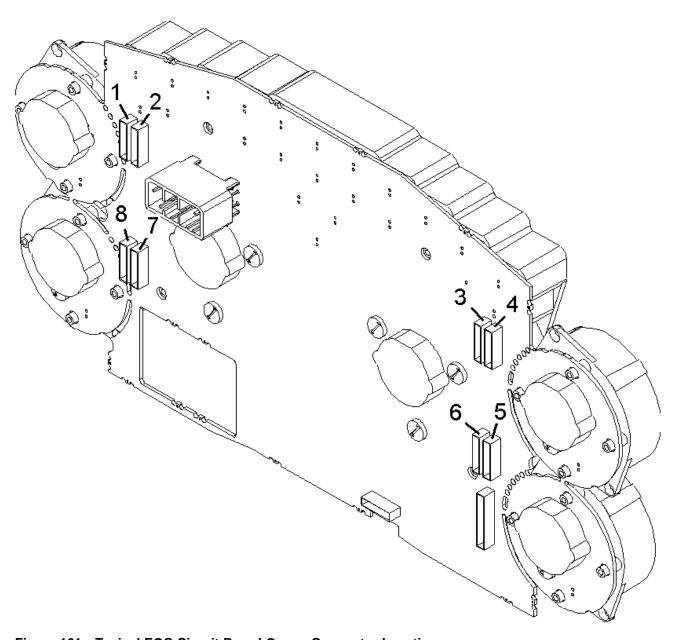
Typical EGC Circuit Board Gauge Connector Location
